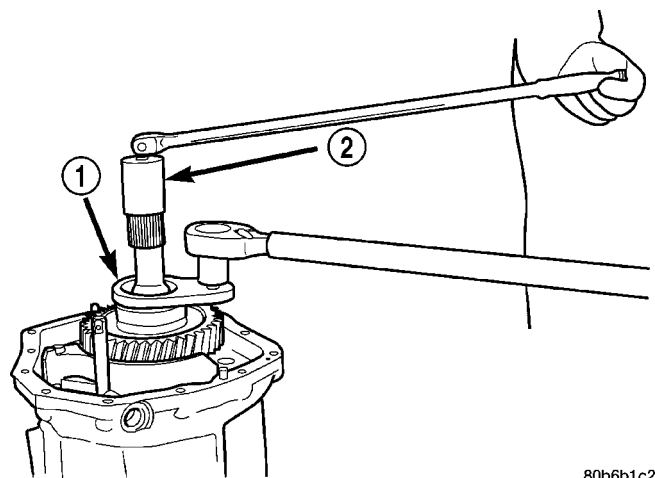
COUNTERSHAFT REAR BEARING PULLER
